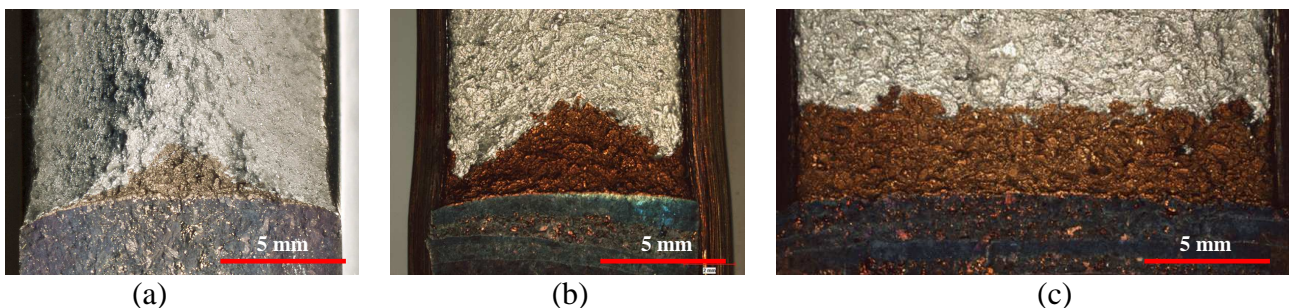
Fracture surface of broken specimens: (a) 12.7 mm thick smooth specimen, (b) 12.7 mm thick side-grooved specimen, (c) 25.4 mm thick side-grooved specimen. Crack front at the end of stable propagation was marked by heat tinting.
